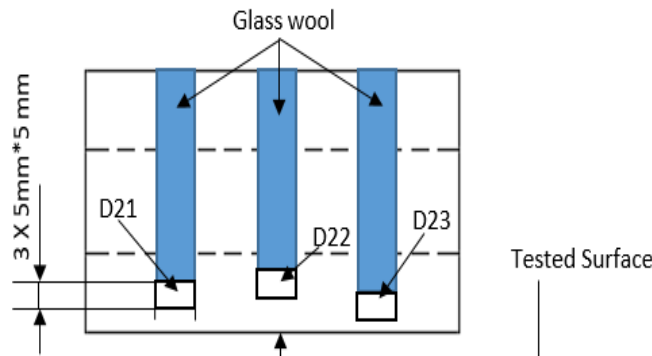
Sectional view of sample with Set – 1 defects with GW.
